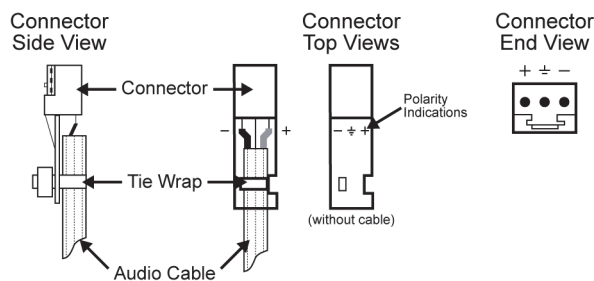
Connector Wiring for Rear Module Input Sockets
